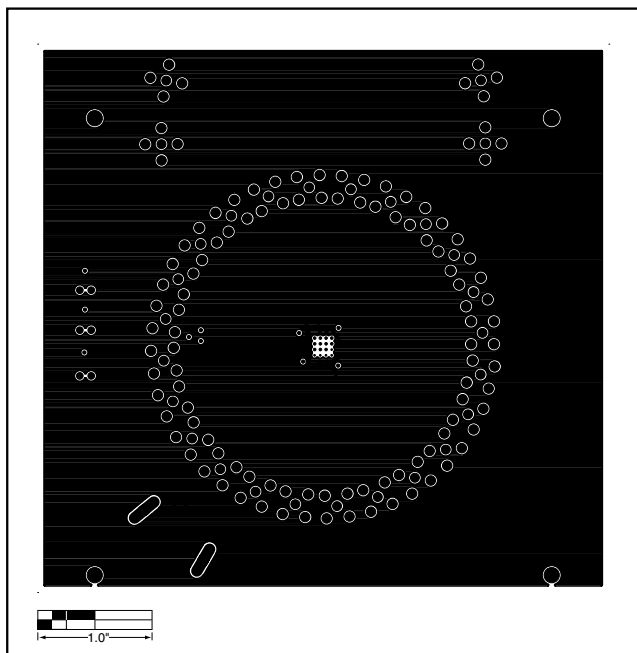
MAX3781 EV Kit PC Board Layout—Power Plane
